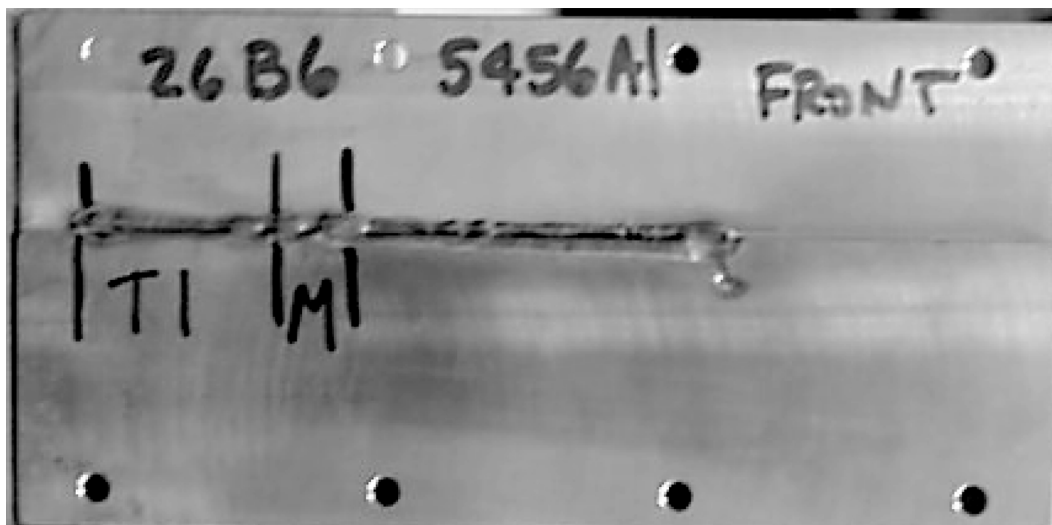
Al 5456 fillet weld (sample 2-6-B-6).
